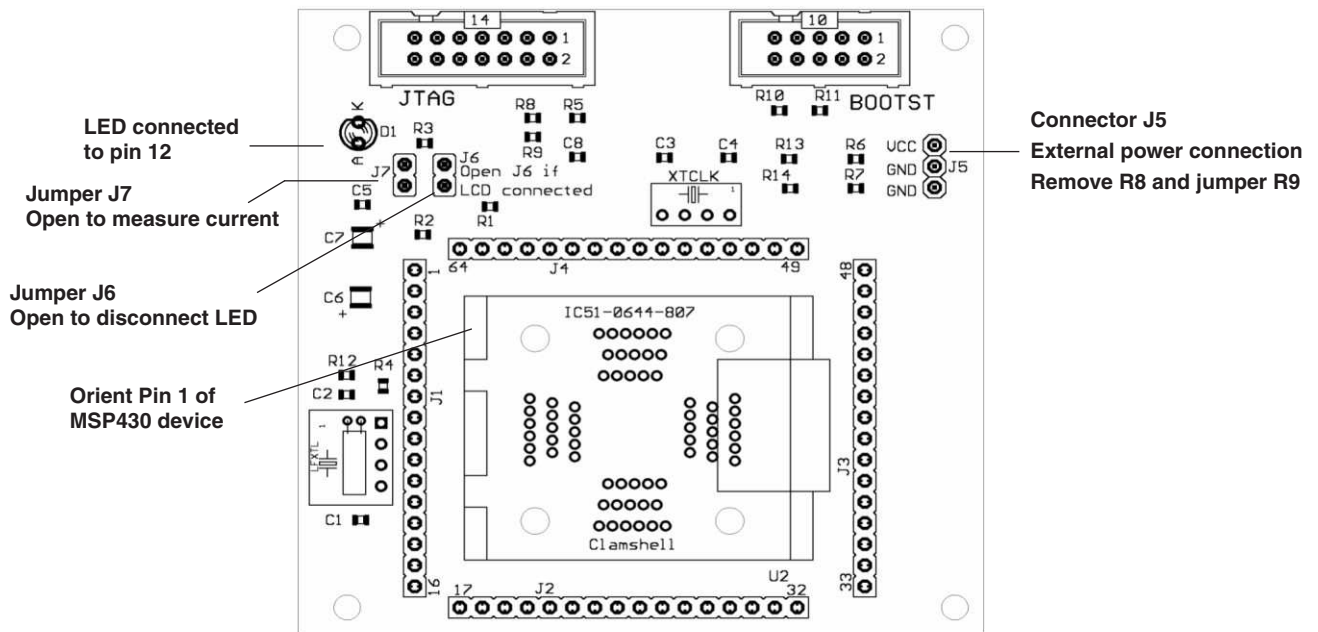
MSP-TS430PM64 Target Socket Module, PCB
